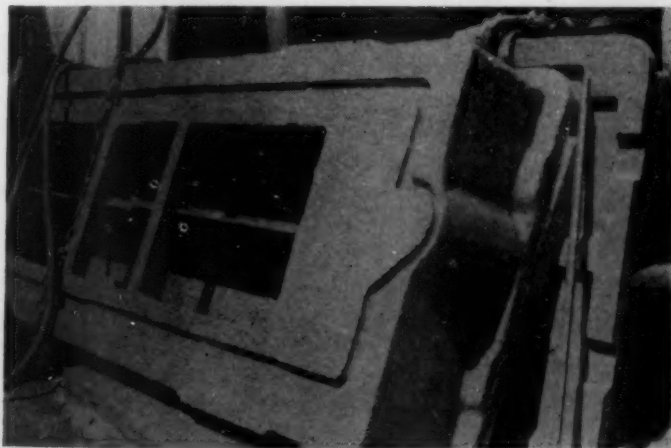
LATHE BED PAN CASTING SHOWING SHARP EDGES.
